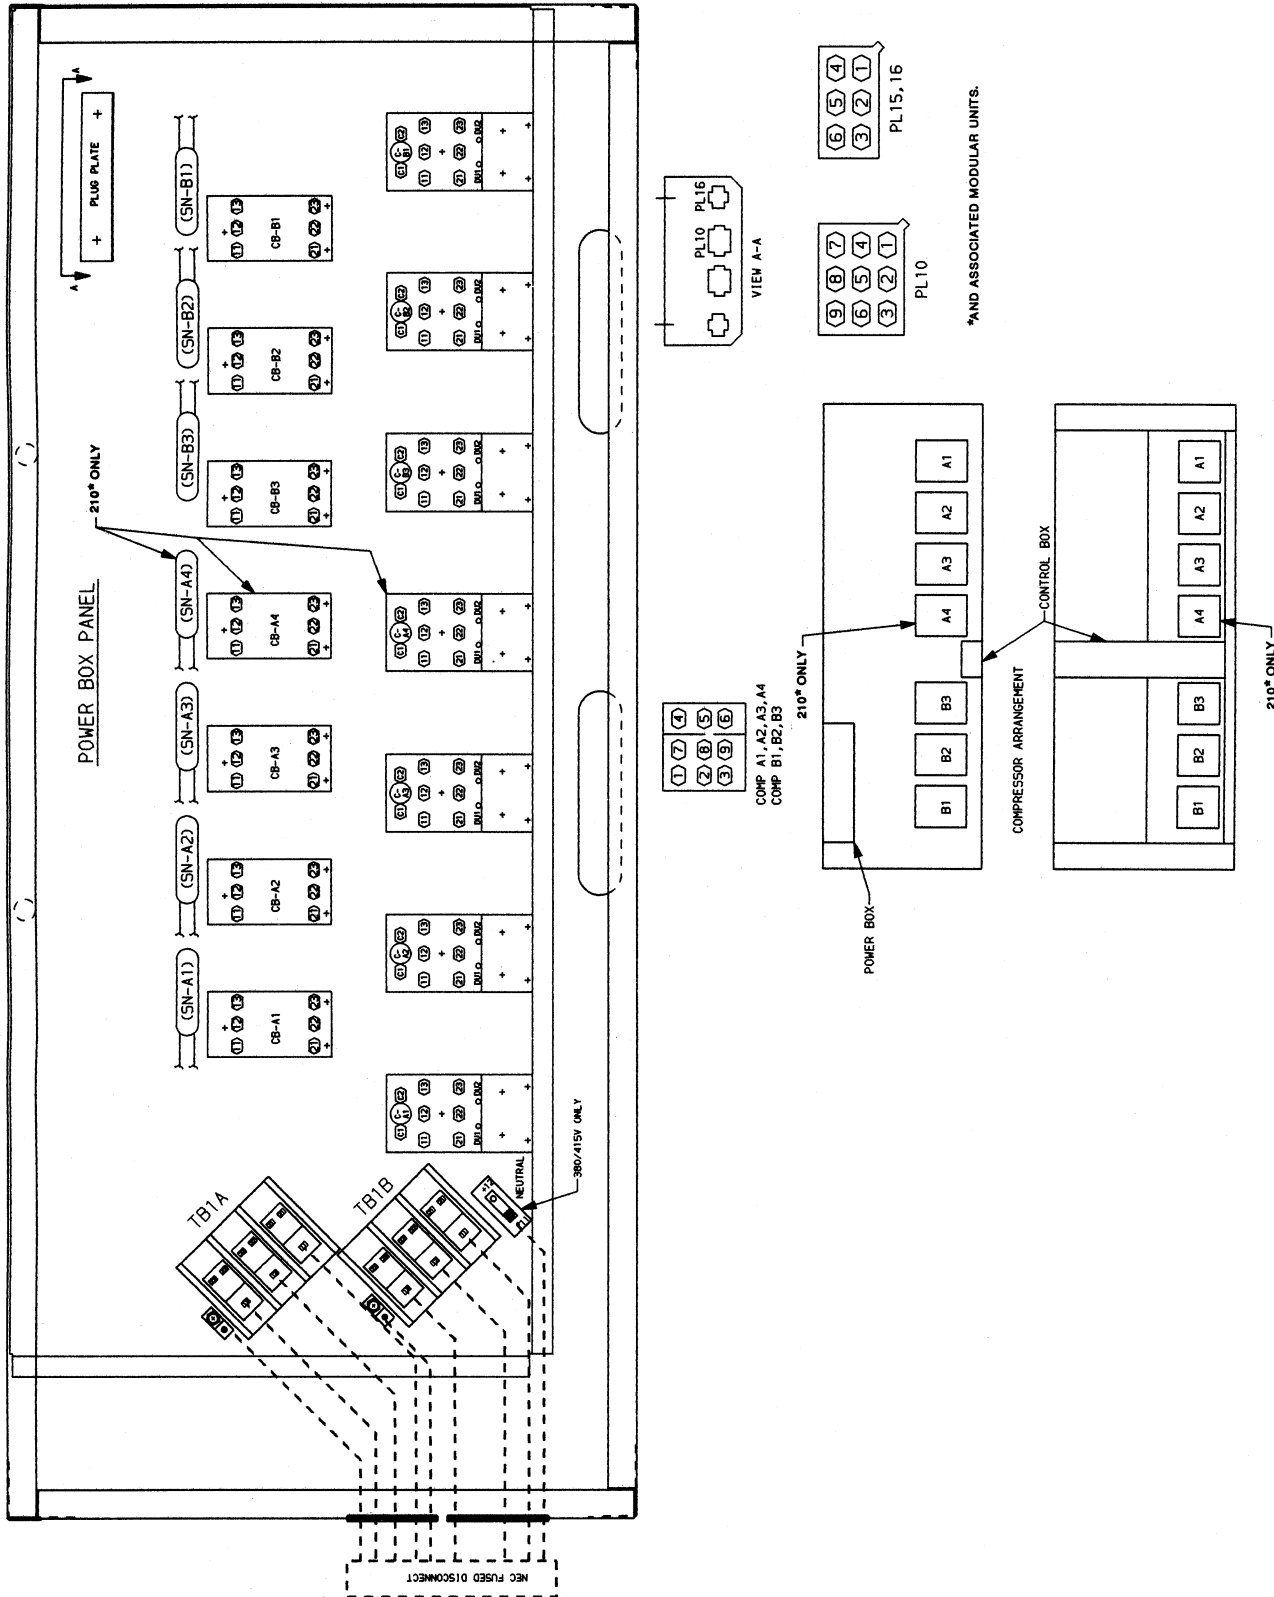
Power Box Location and Component Arrangement; 30GTN,GTR,GUN,GUR170-210, 270A-315A, 330A/B-420A/B; 380, 380/415, 460, 575 V - XL
